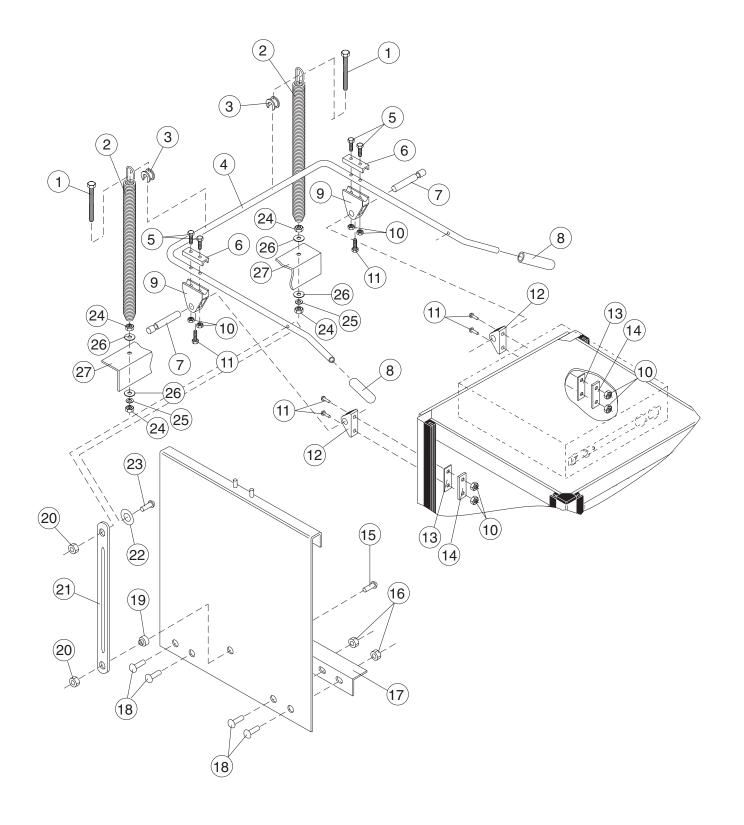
D-HB/D-H1/D-LF Door Handle and Spring Assembly
